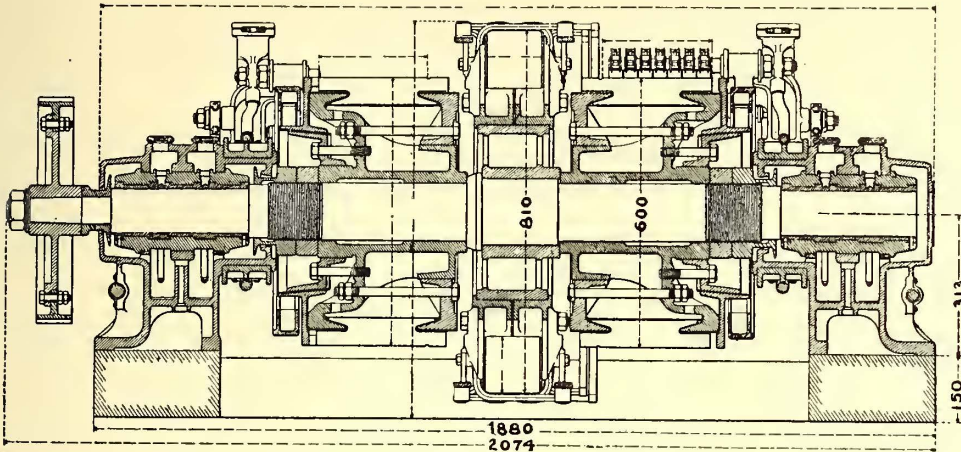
LONGITUDINAL SECTION OF RECTIFIER
